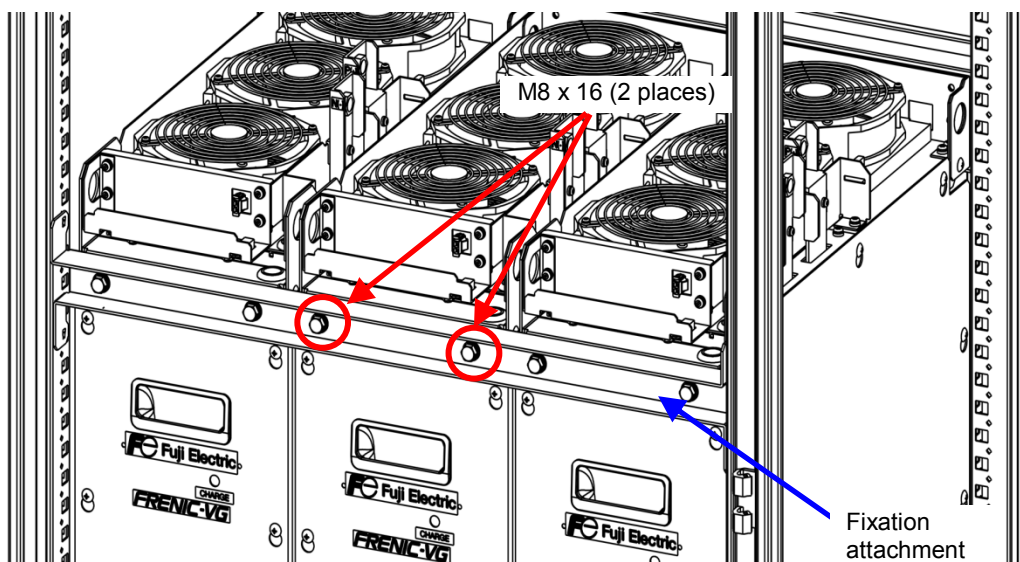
Fixing the front face lower area for Frame 3 and 4 size stacks
